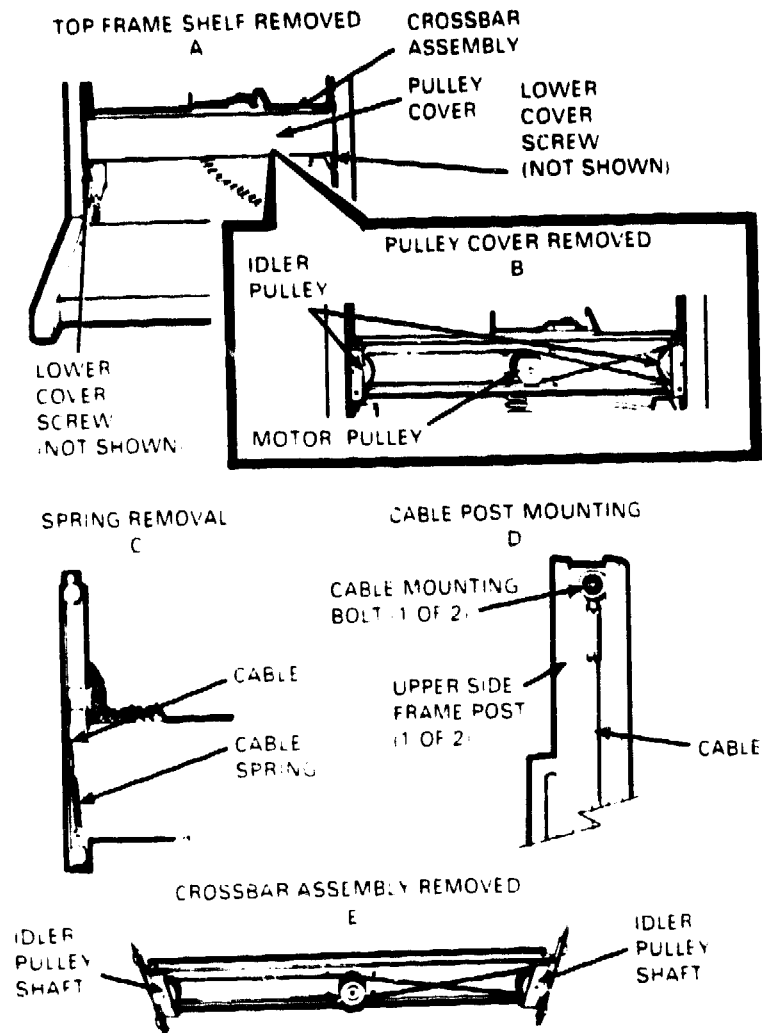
Paper Stacker Pulley Removal and Cable Post Mounting
